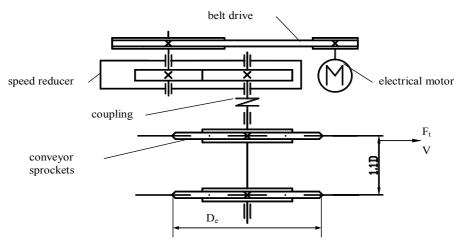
Design a belt conveyor mechanical drive. If turning force Ft, peripheral speed V at well as diameter of sprockets D are given (Table A).
